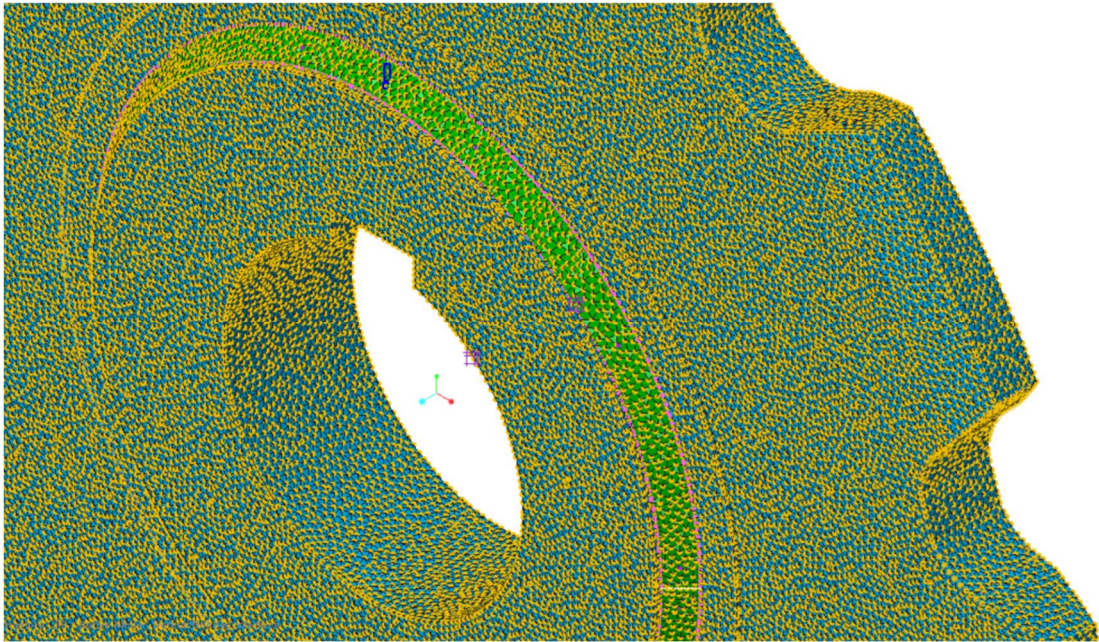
A mesh size of 2mm is created for the sprocket, weld constraint and the shaft.
